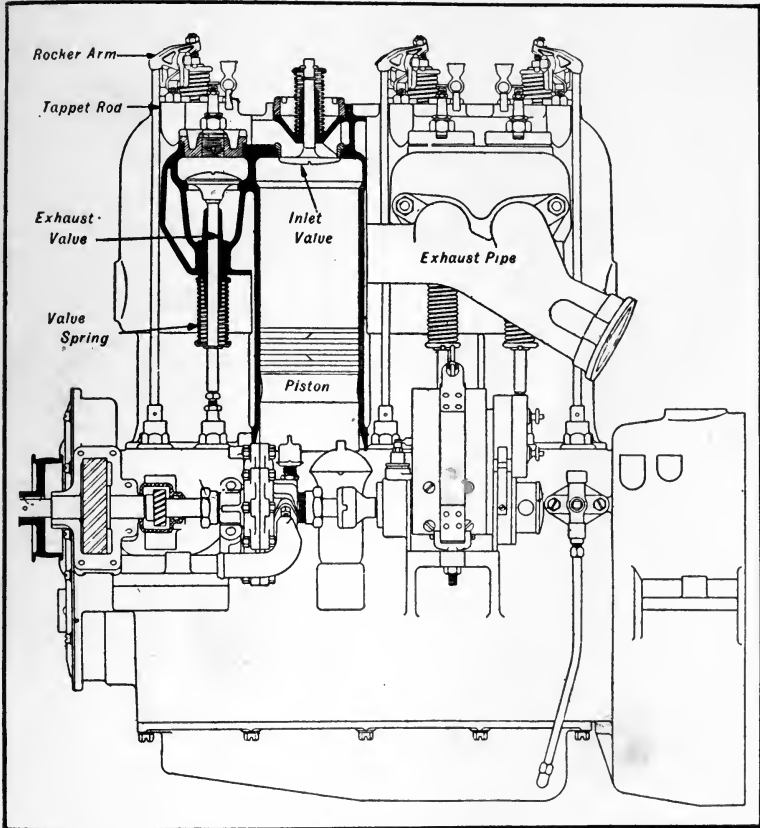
Part Sectional View of Bergdoll Motor, Showing Placing of Valves. The Exhaust Member is Fitted in a Side Pocket of the L Cylinder. The Inlet Valve is Placed Directly in the Center of the Combustion Chamber.
